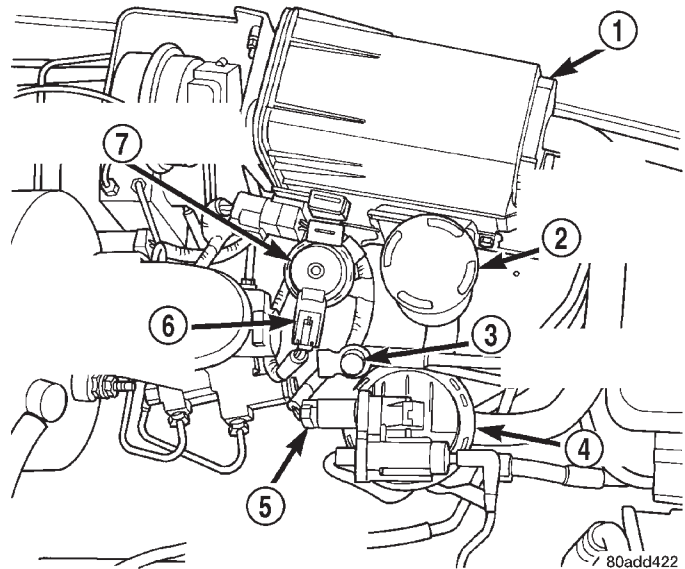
EVAP Canister, Purge Solenoid and LDP Location
